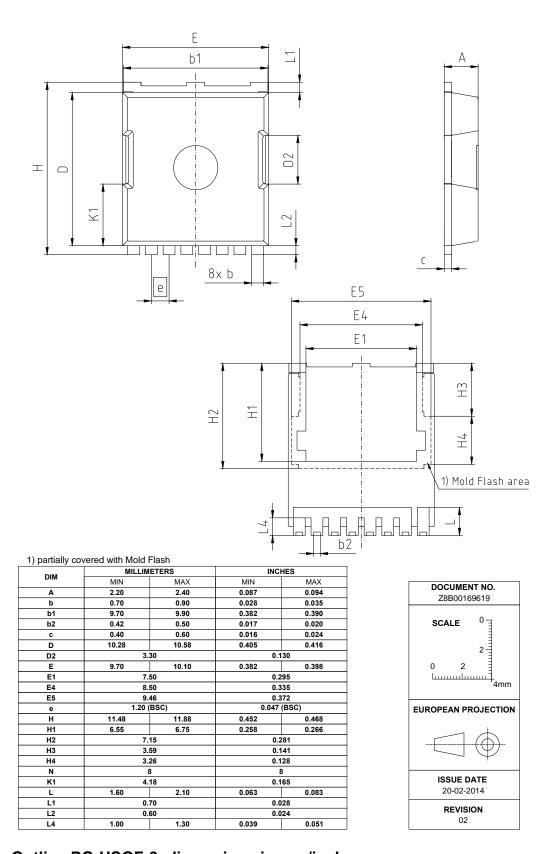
Outline PG-HSOF-8, dimensions in mm/inches
